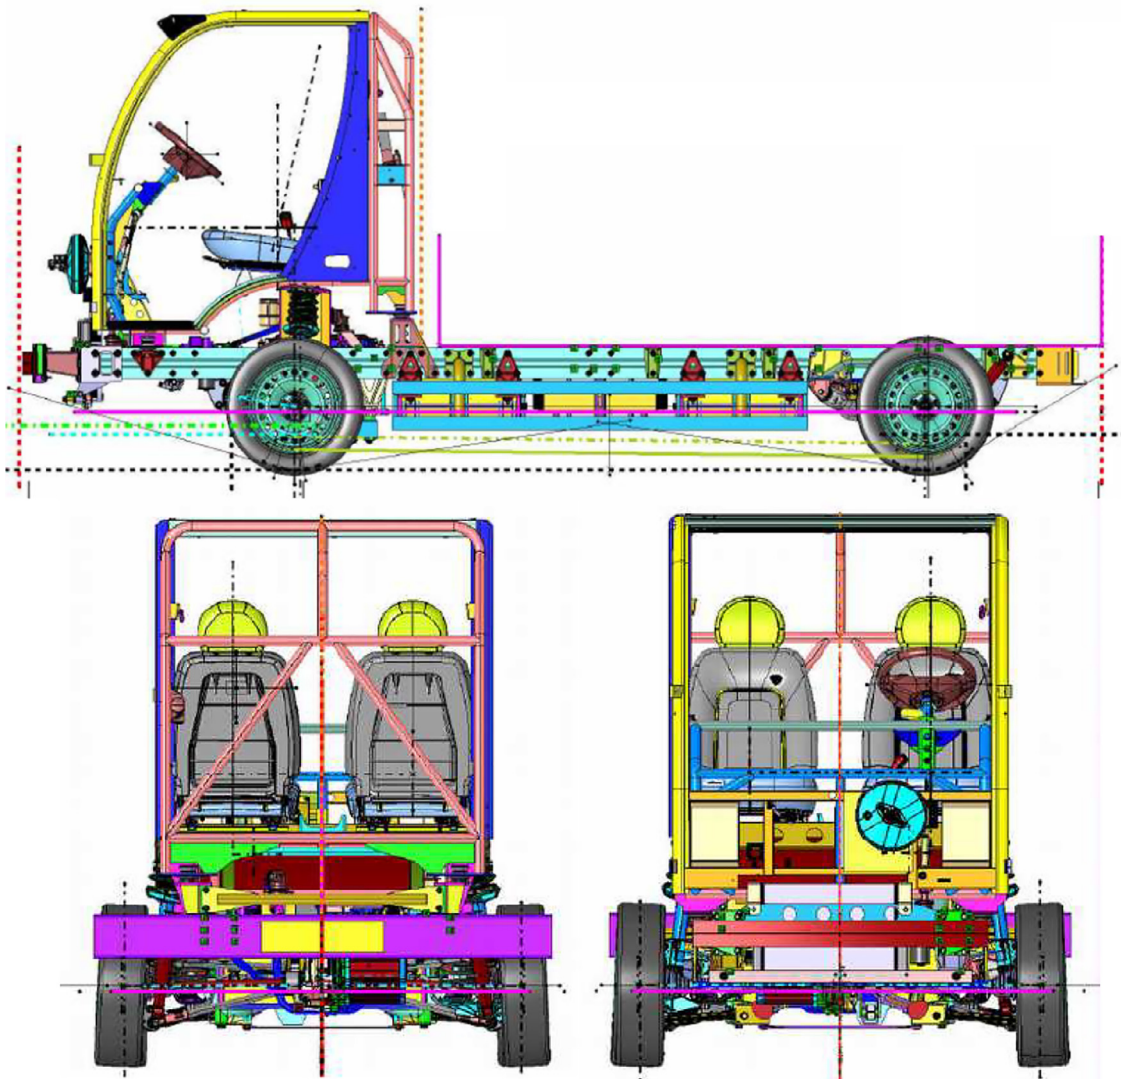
Side front and back view of the mechanized chassis assembly with cab structure.
